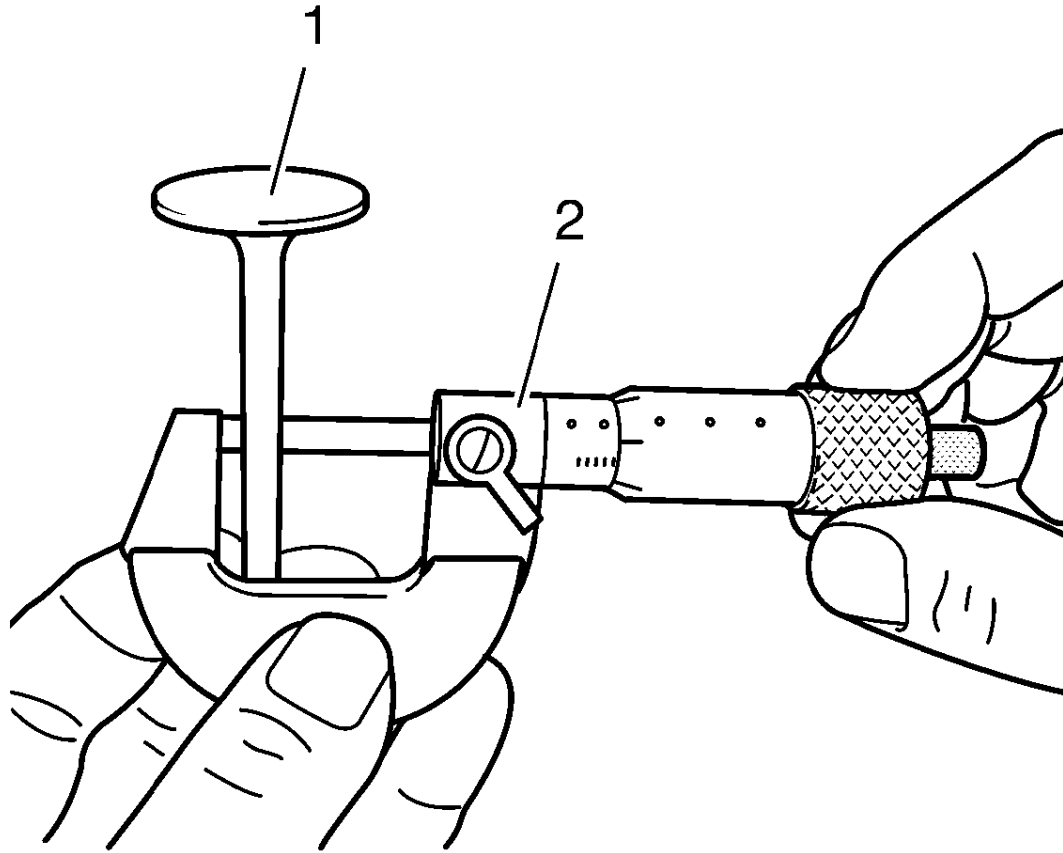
Measuring Valve Stem Diameter Using Micrometer Gauge
